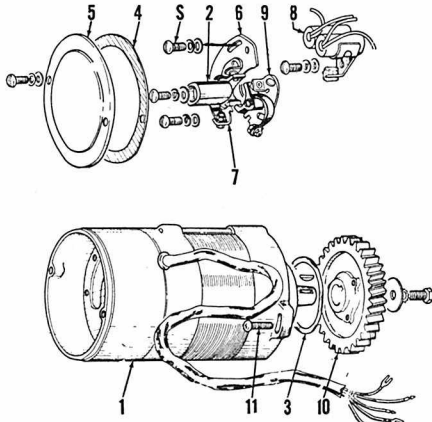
Exploded view of early ignition timer. Alternator (1) is available only as a complete unit.
